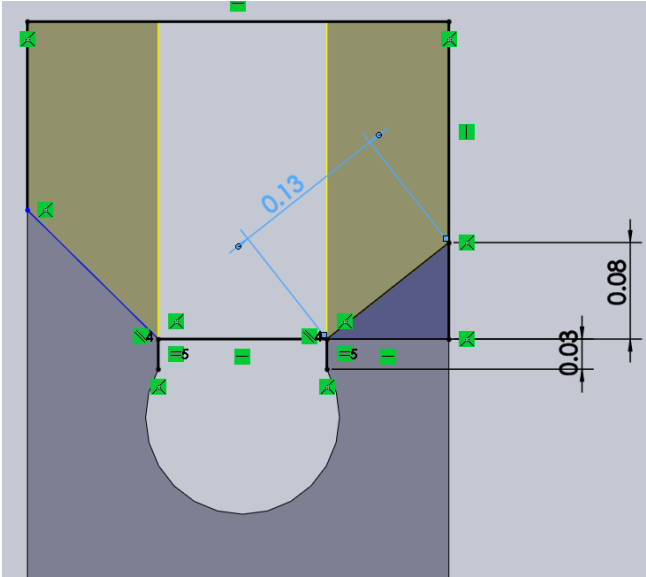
Updated Dimensions of the V-Cut on the Axle Mounts
